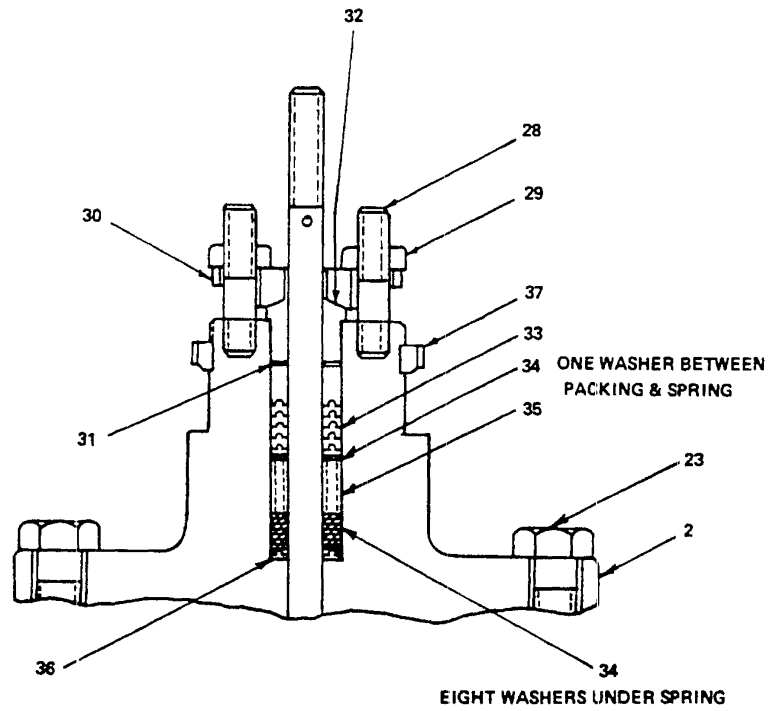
Spring-Loaded Packing Assembly for 8-Inch Valves
